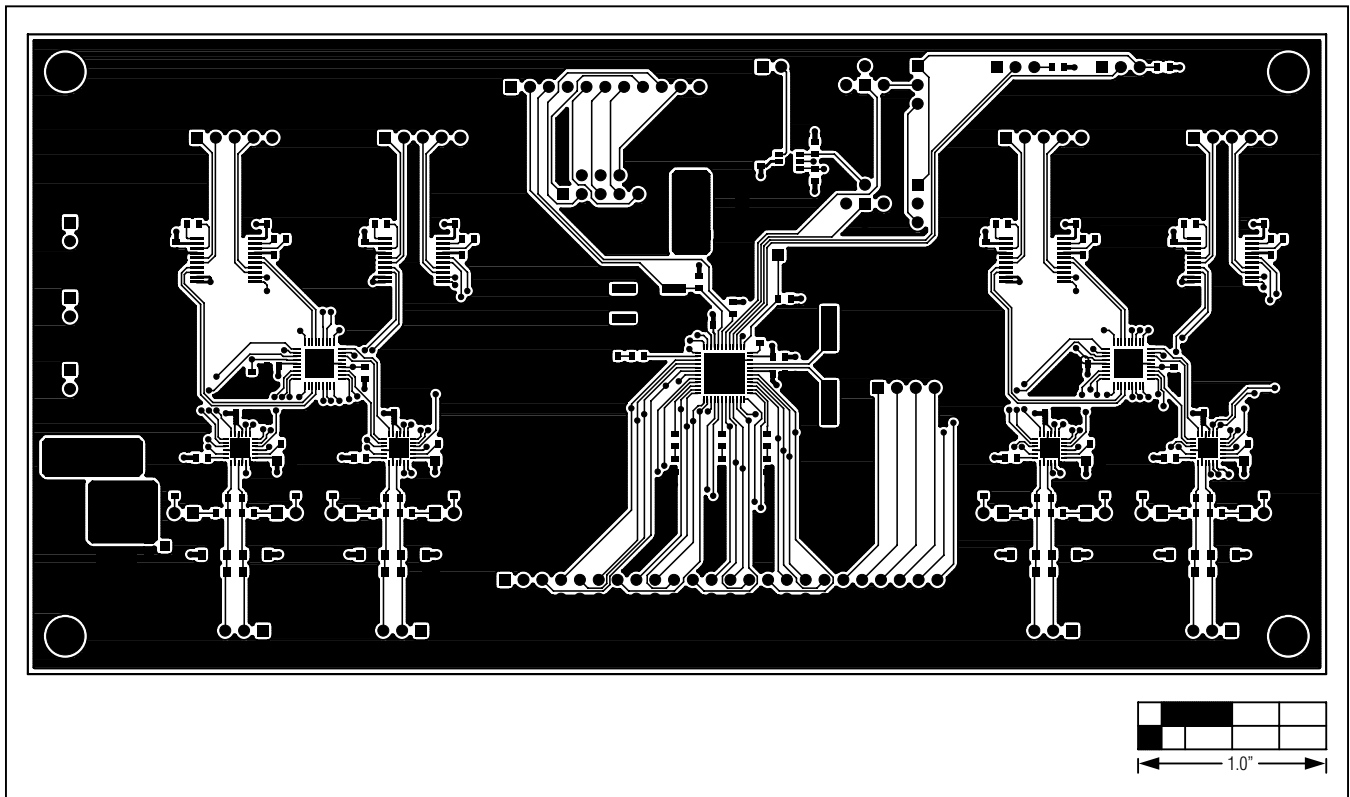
MAX14830 EV Kit PCB Layout—Component Side
